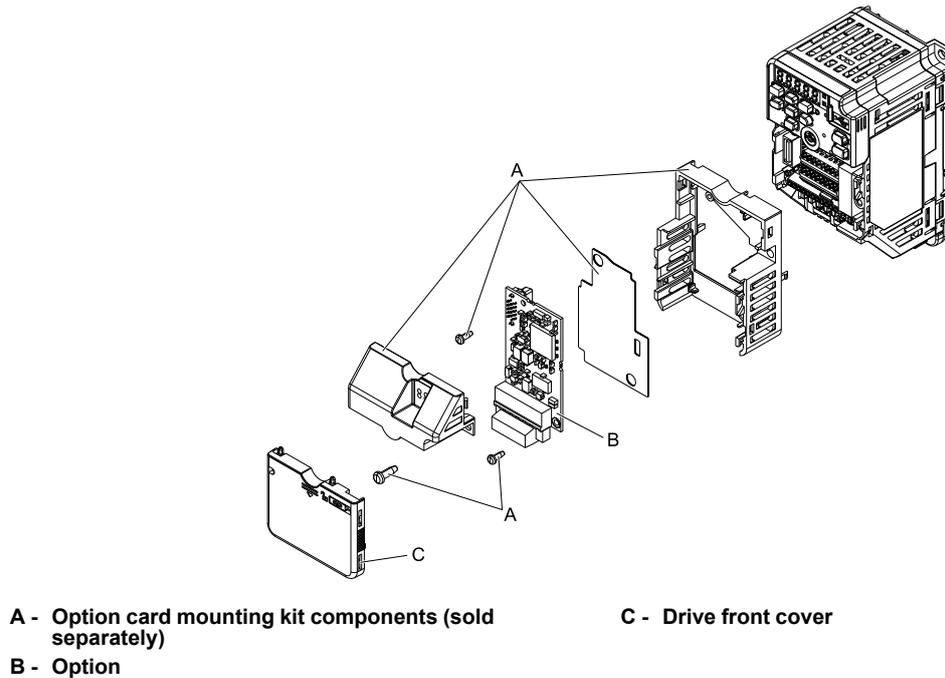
Option Card Mounting Kit (JOHB-GA50)
